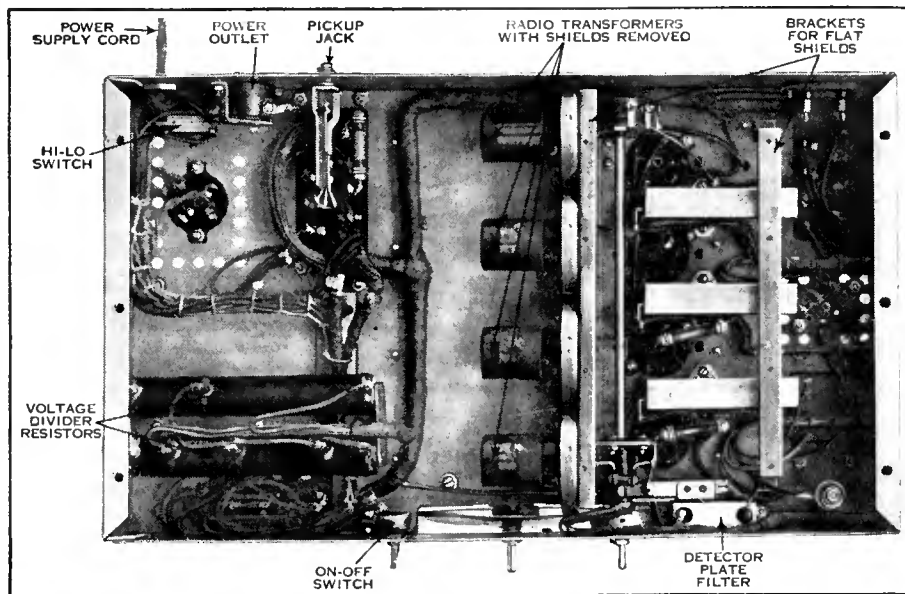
Bottom view of the screen-grid chassis with all shields removed.
